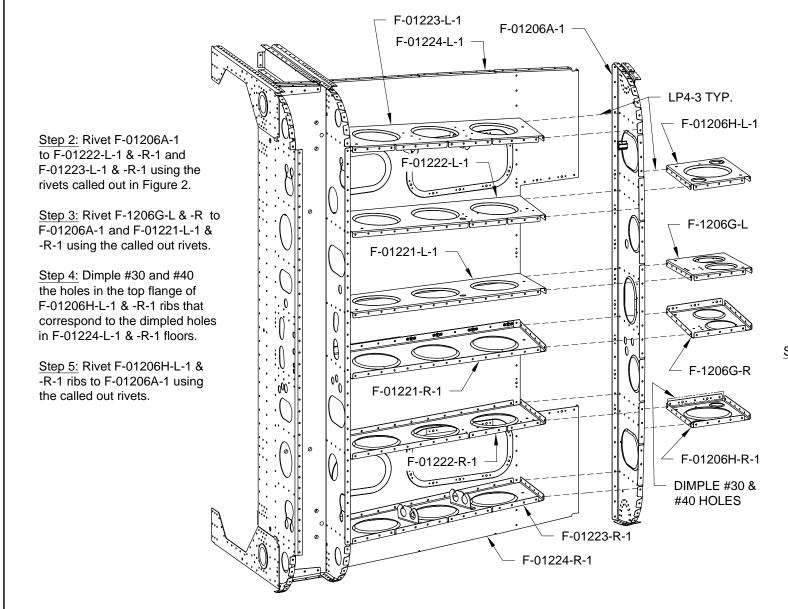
RIVETING F-01206A-1, F-1206G-L & -R, & F-01206H-L-1 & -R-1
